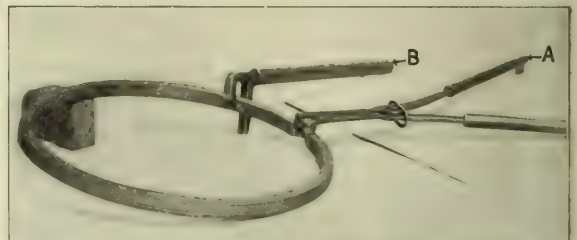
Tools for Applying Snap Rings to Piston Head.
